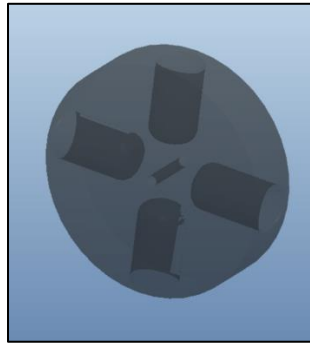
Seed dispensing wheel which is connected to a stepper motor
